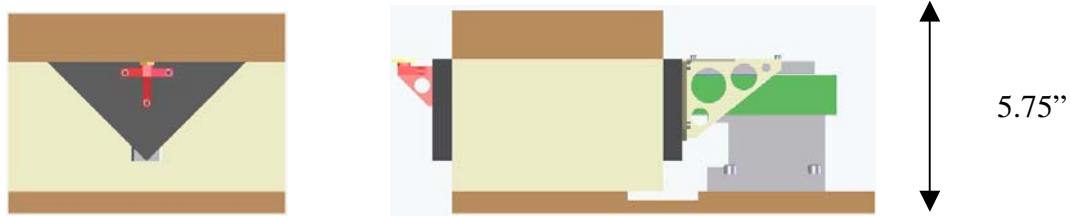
Front view (left) and side view of Live-Axis Turning Axis
